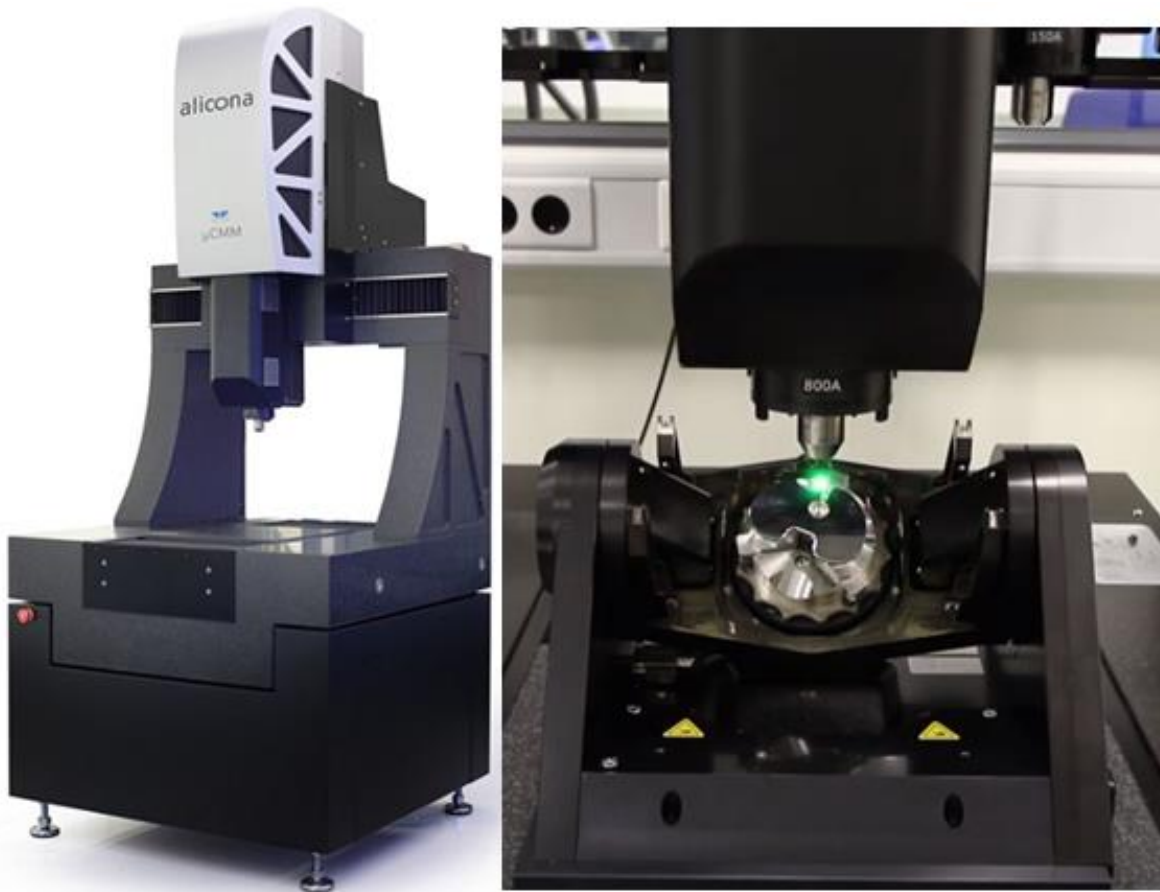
Bruker-Alicona uCMM. Left: Overview of the entire uCMM machine [131]. Right: Detailed view of the 'Real 3D' fixturing device, pictured holding a knee implant component [175].
